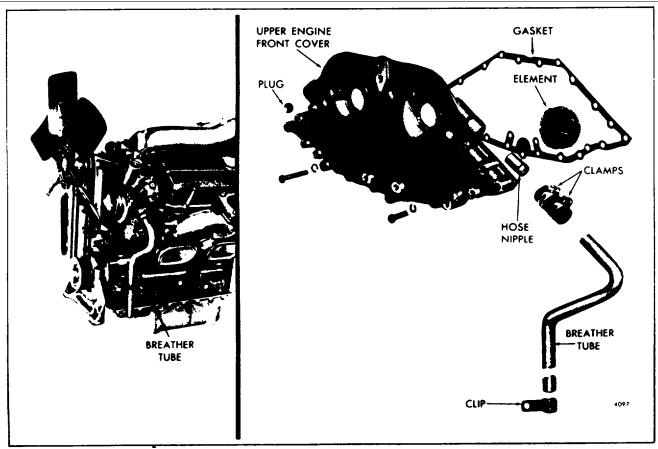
Typical Crankcase Breather Mounting and Details (6V-53 Engine)
